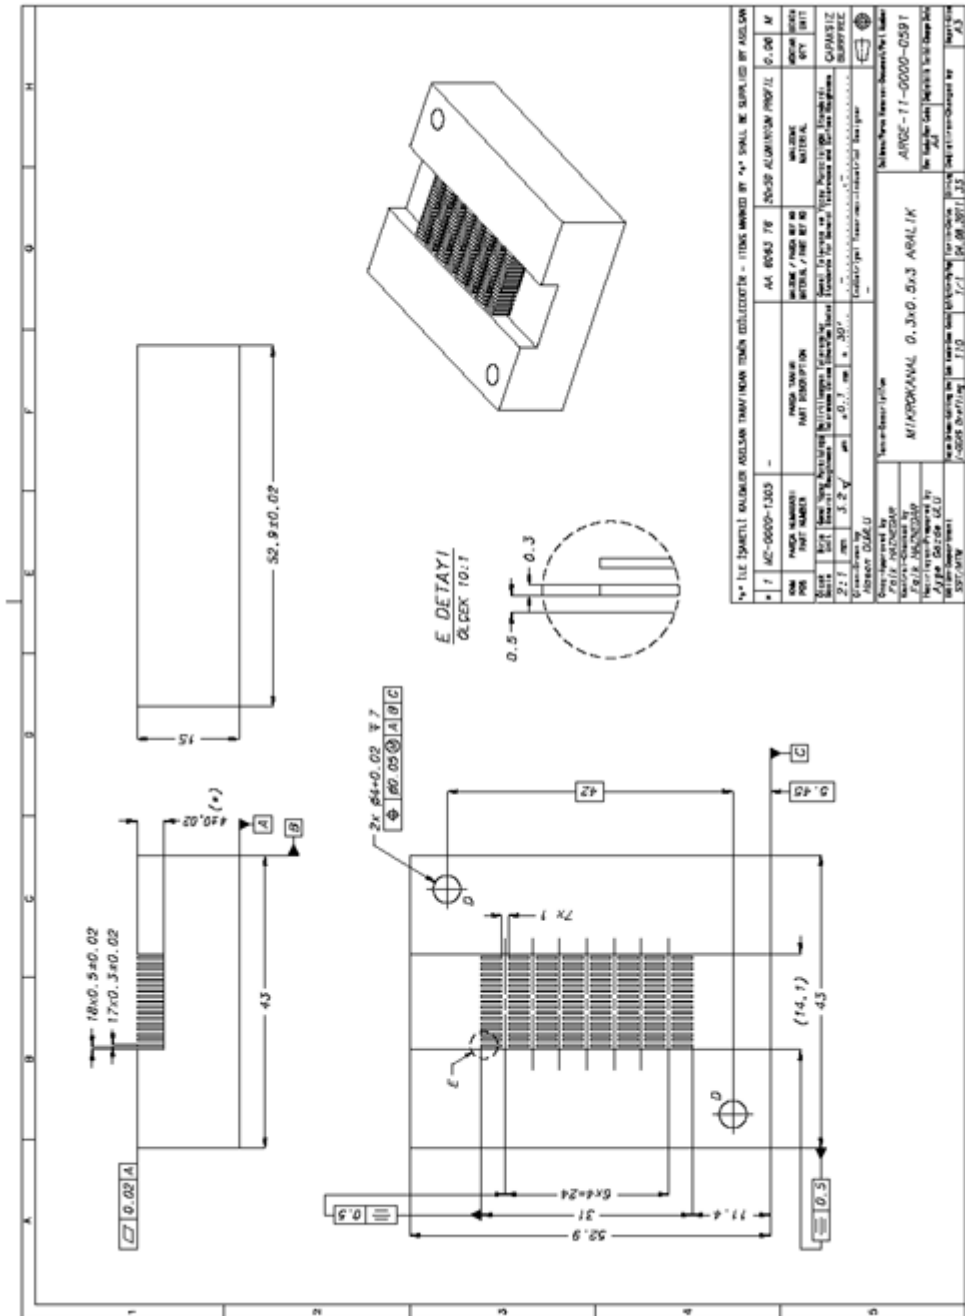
Technical drawings of 500 micron wide multi interrupted channel
